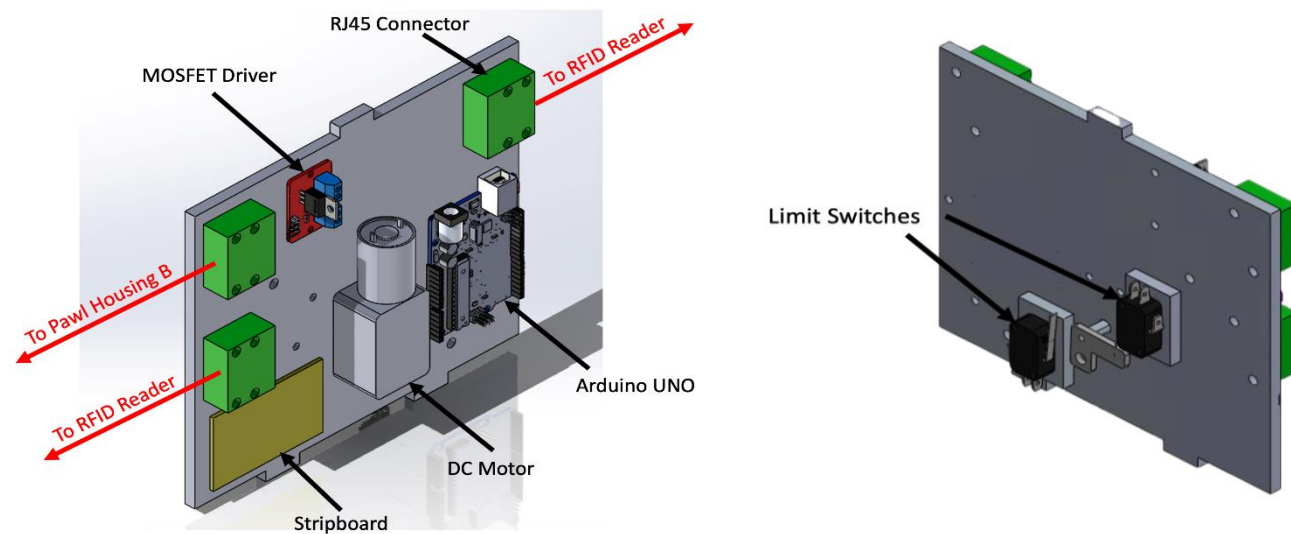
SolidWorks of the back of electronics panel (left) and front of panel (right).
